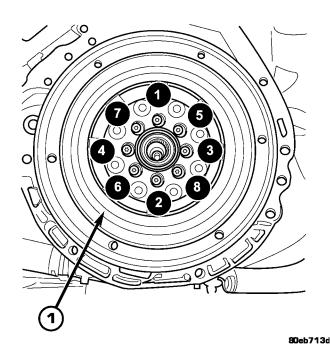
Flywheel-to-Crankshaft Bolt Pattern
